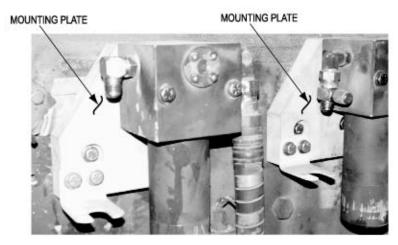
Hydraulic Filter Mounting Plates Shown Installed
